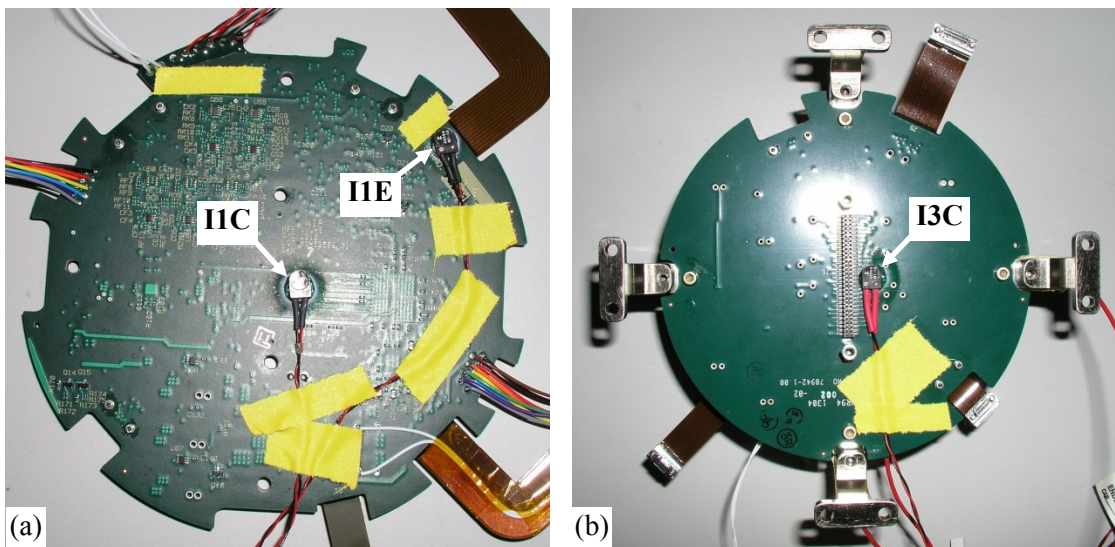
Prototype of the electronics assembly, showing circuit boards in the stack.
